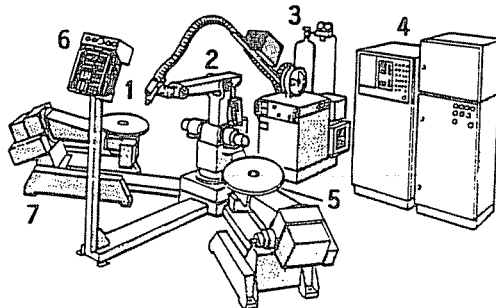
Components of a Robotic Arc Welding Unit 1) Welding gun 2) Robot arm 3) Welding power source, wire feeder and gas supply 4) Robot control cabinet 5) Nozzle cleaning equipment 6) Operator control station 7) Manipulator
